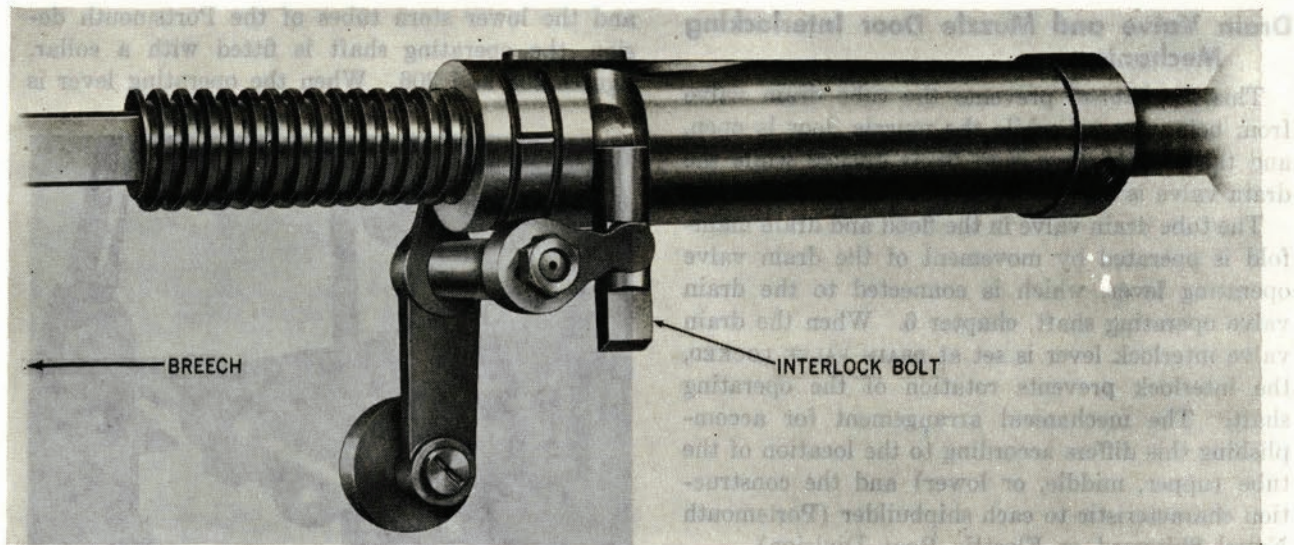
Muzzle Door Closed and Locked—Breech and Muzzle Door Interlock Bolt Engaging Slide.
